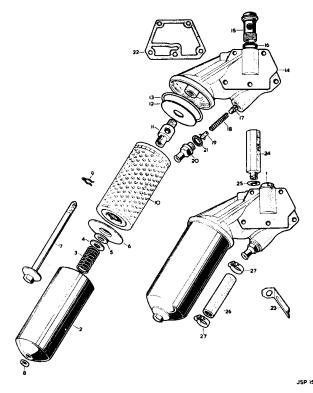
Exploded view of oil filter (1) Oil filter assembly (2) Canister (3) Spring (4) Plain washer (5) Felt washer (6) Pressure plate (7) Bolt (8) Rubber washer (9) Spring clip (10) Element (11) Anchor insert (12) Clamping plate (13) Sealing ring (14) Filter head (15) Balance valve (16) Washer (17) Relief valve (18) Spring (19) Spider (20) Adaptor (21) Washer (22) Gasket (23) Bracket (24) Adaptor (25) Washer (26) Hose (27) Clips
